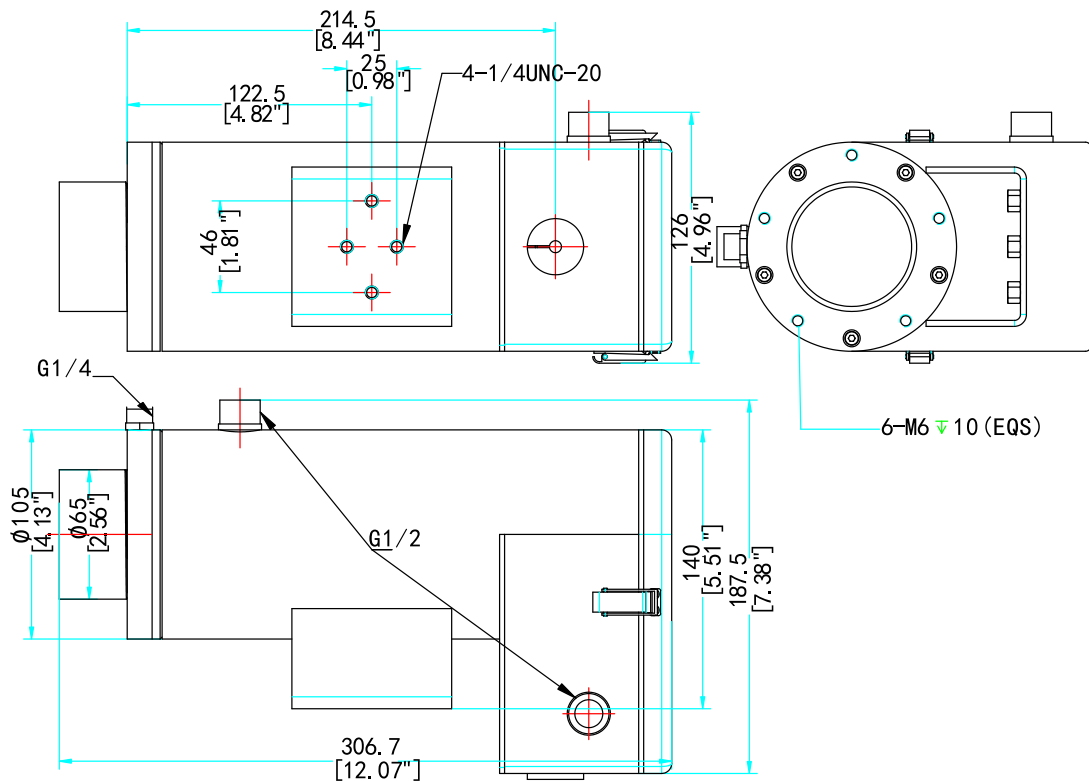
Dimension of Water/Air Cooled Housing (Unit: mm [inch])
